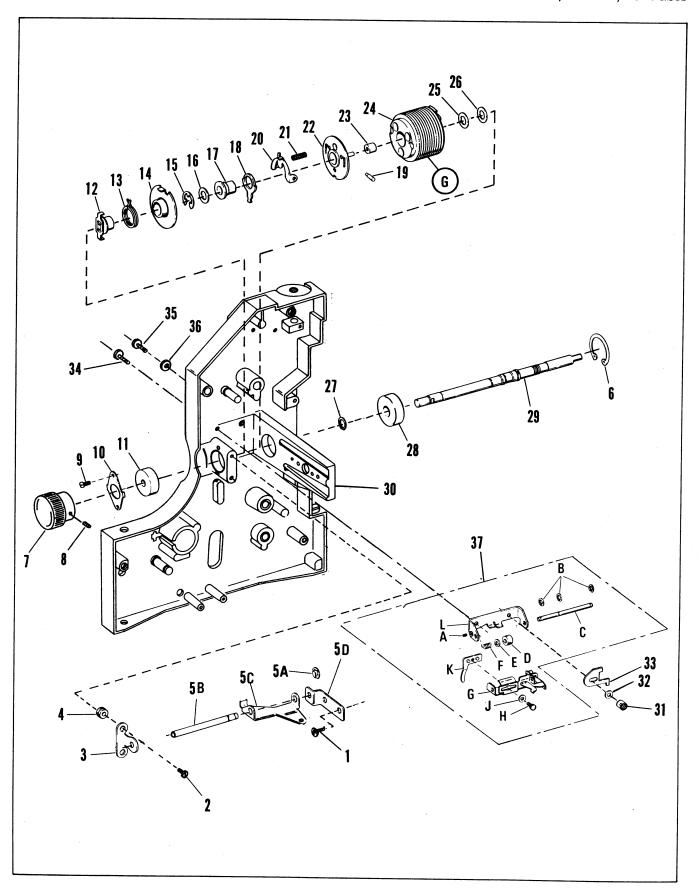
Mechanism Assembly - View II (Animated Clutch Parts)
